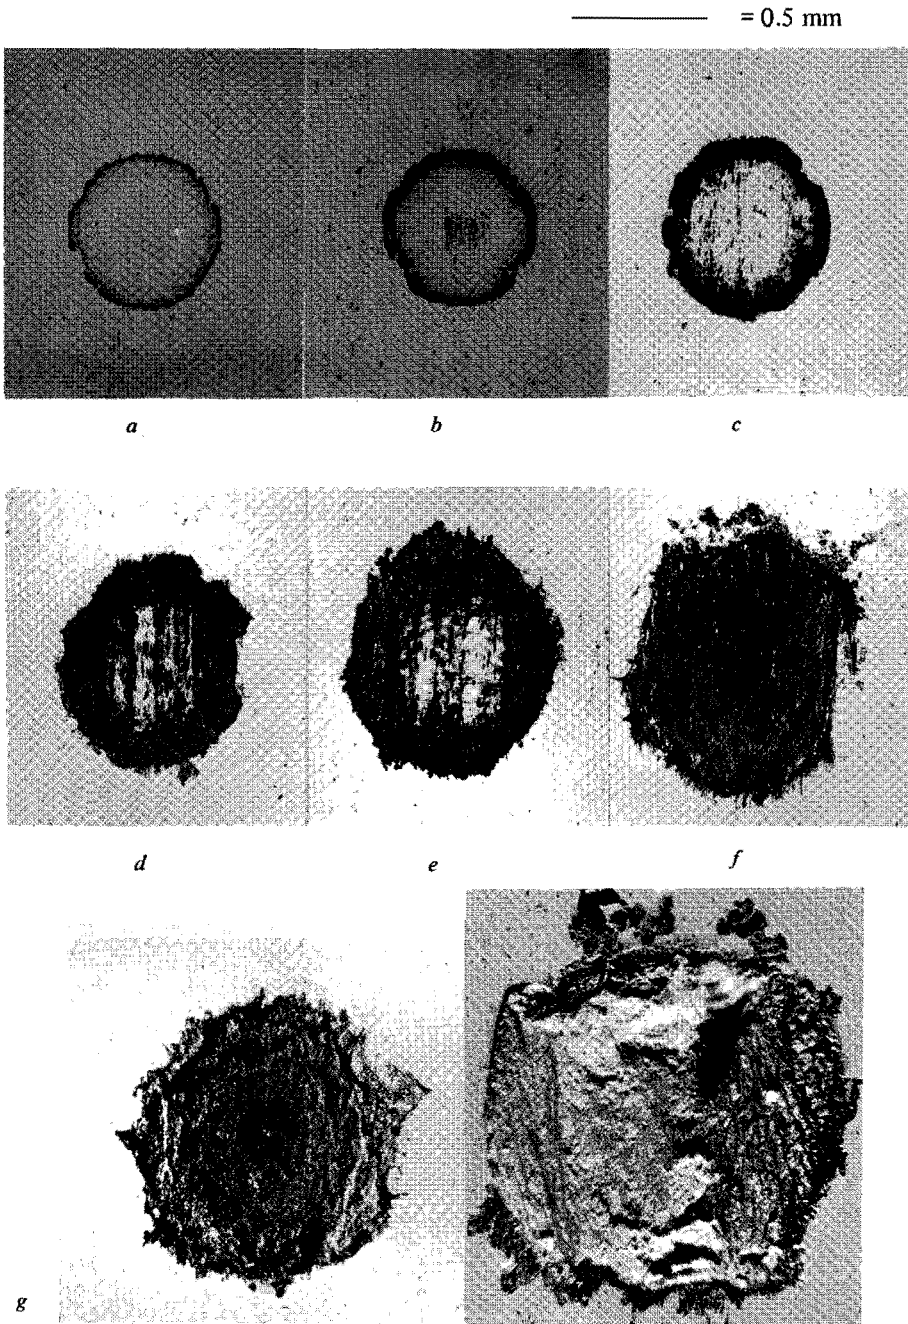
Welds produced by welding the spherical welding tip directly to the anvil. Material of tip and anvil: Al (hard). Clamping force $F_C = 100$ N. Welding time $t = 200$ ms.
